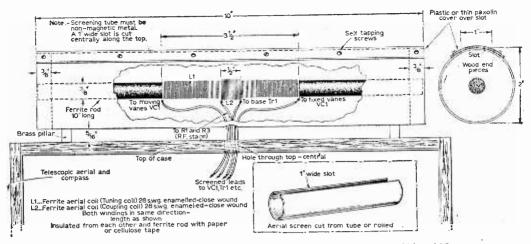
Construction details of the d.f. aerial housing and winding details of LI and L2.
